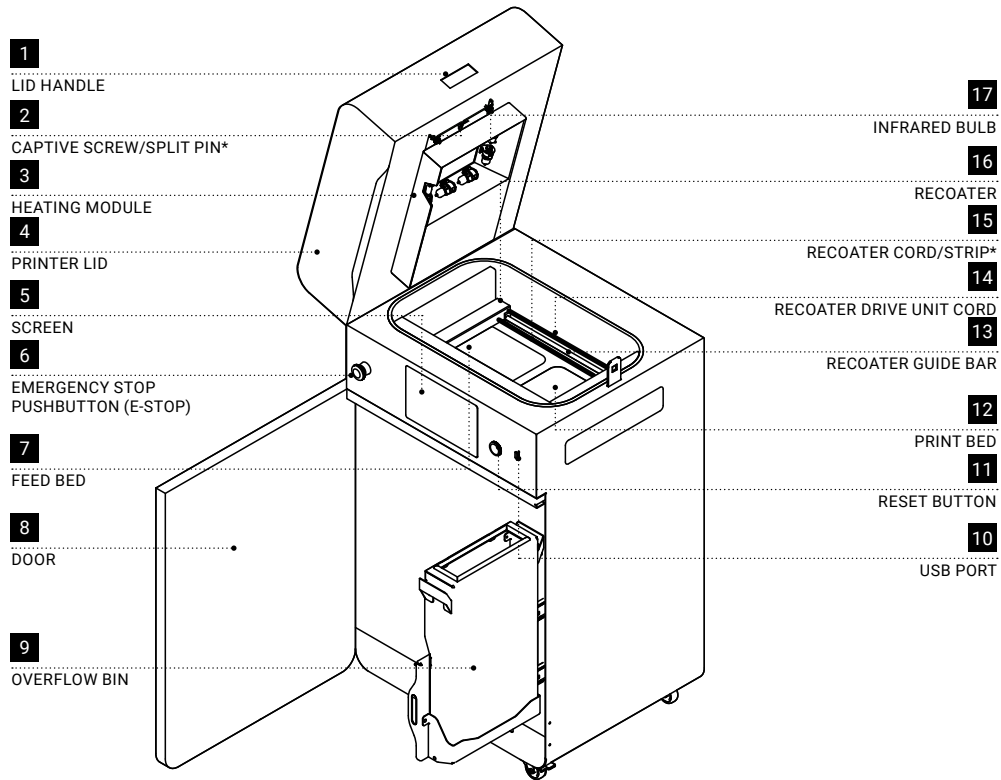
Front view of the printer, heating module and Overflow bin.
